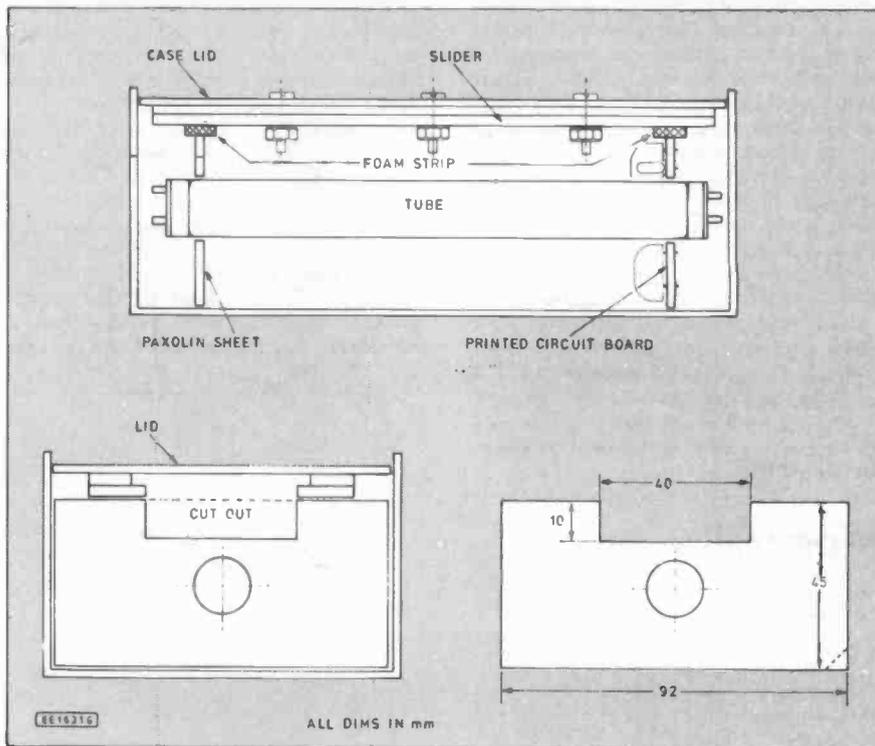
Suggested arrangement for mounting the tube inside the plastic case.
